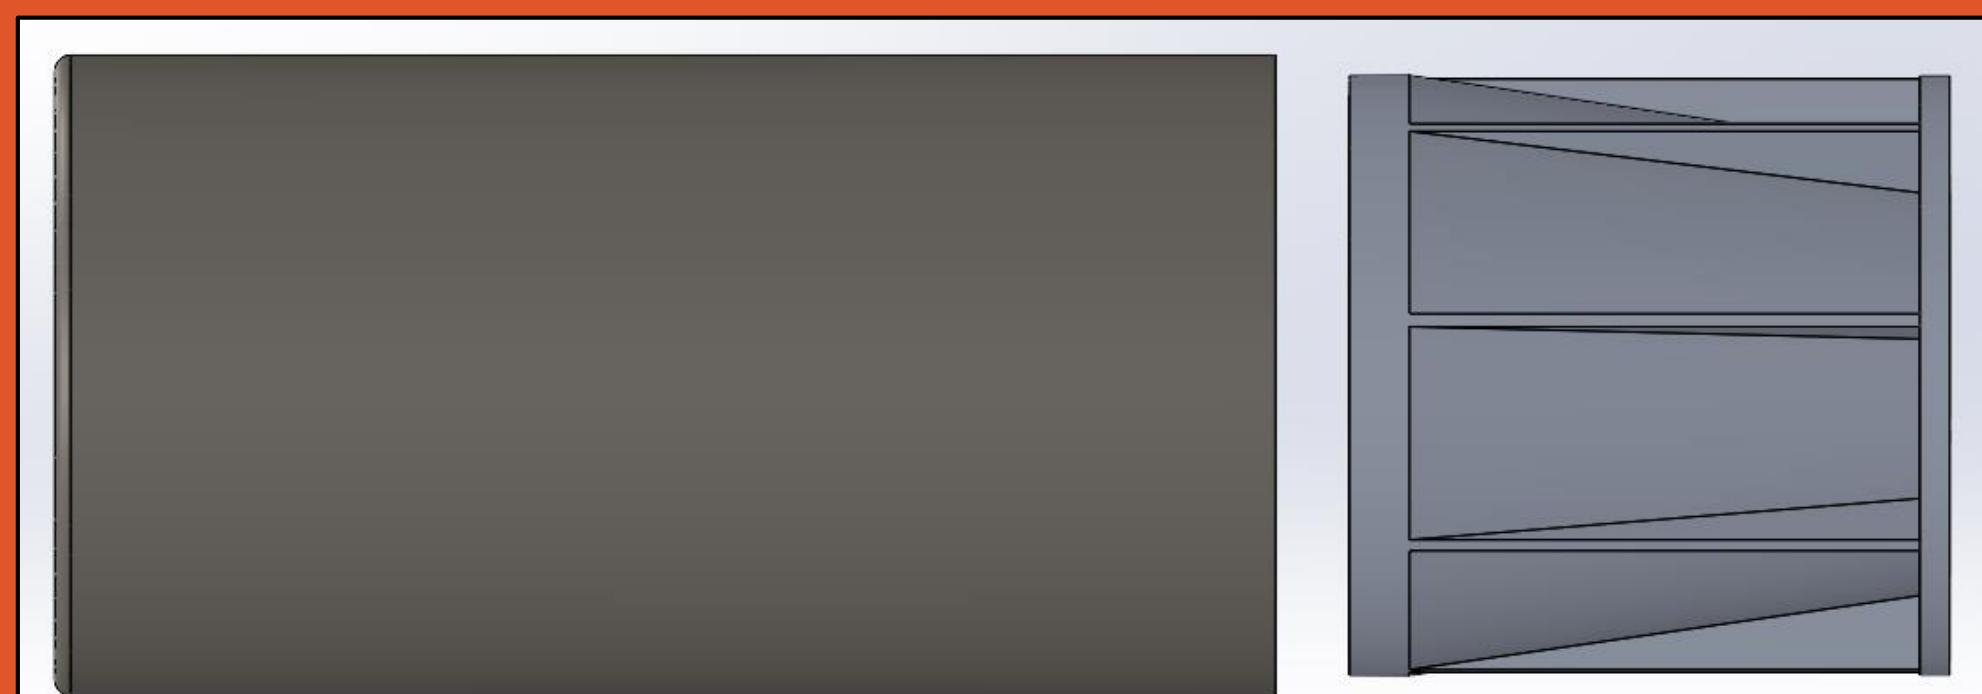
Exploded view of the simplified final design including the outer housing (left) and nozzle (right).
